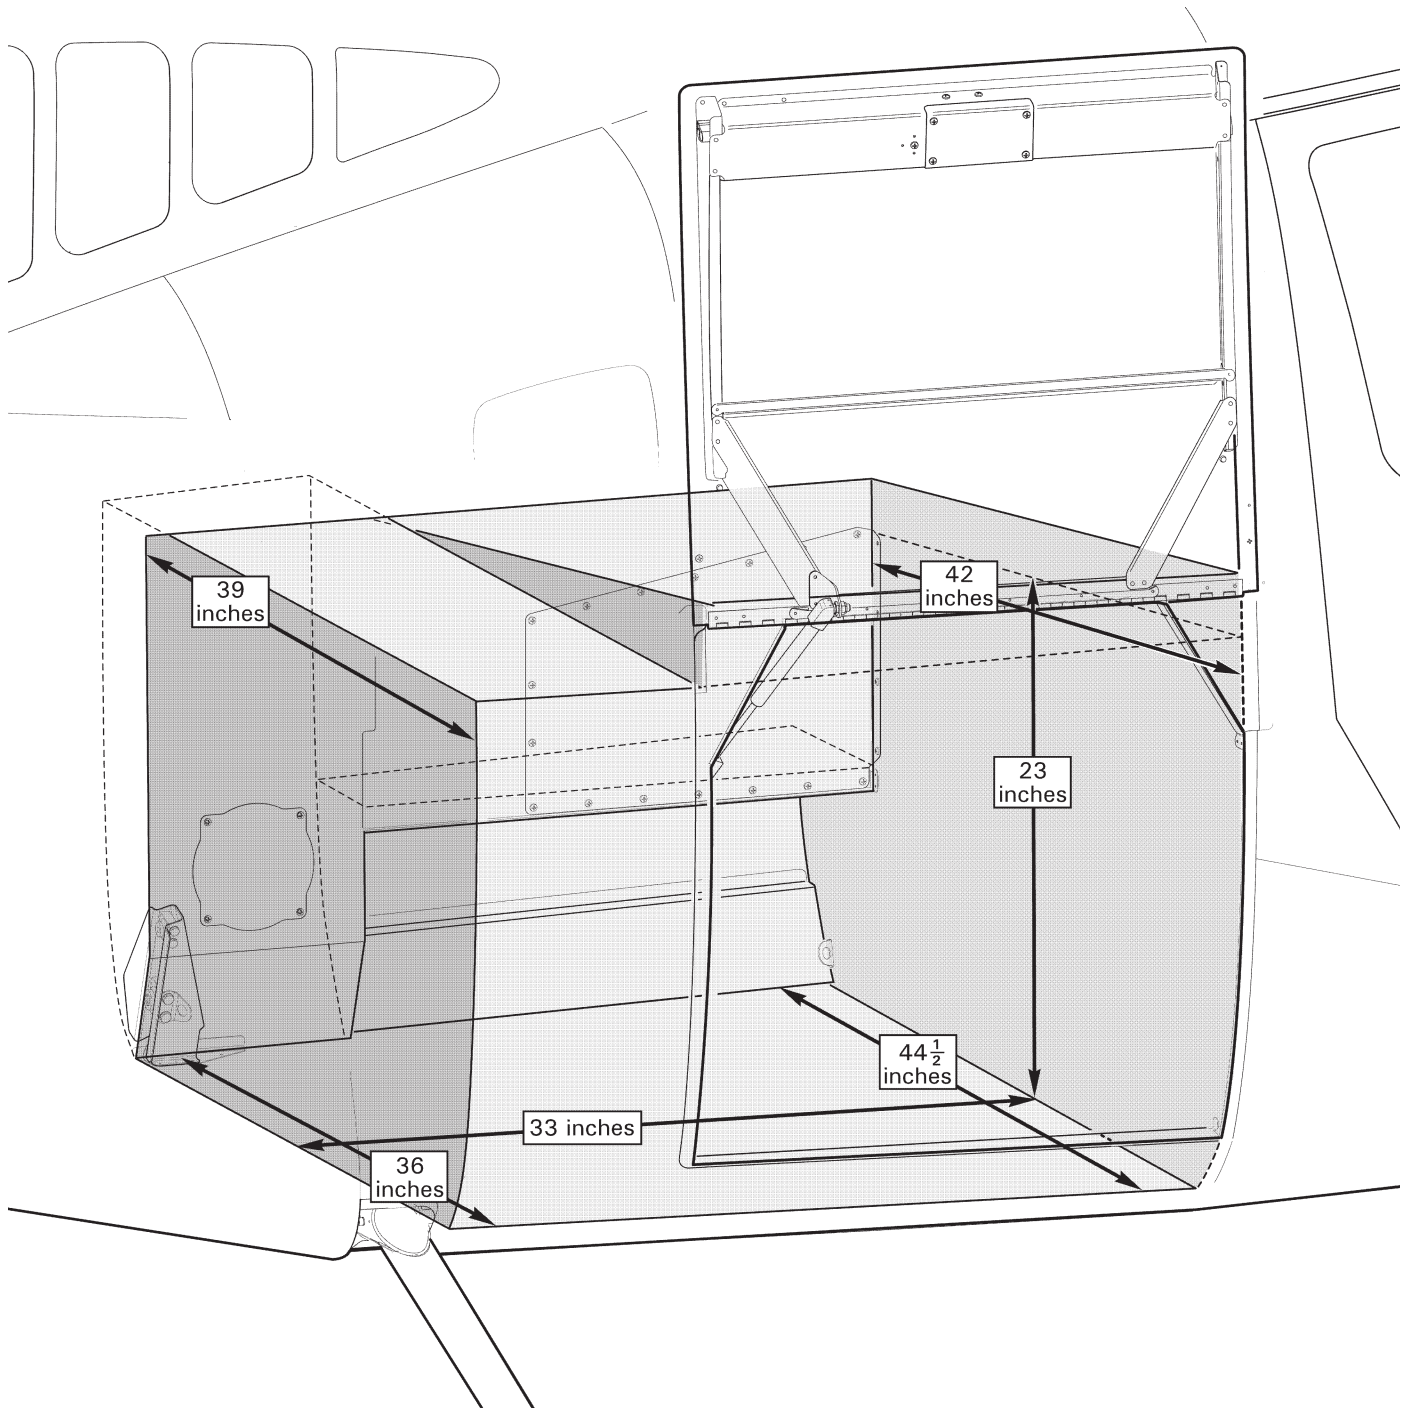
BAGGAGE COMPARTMENT INTERIOR DIMENSIONS
